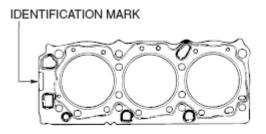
Cylinder Head Assembly Courtesy of MITSUBISHI MOTOR SALES OF AMERICA.
